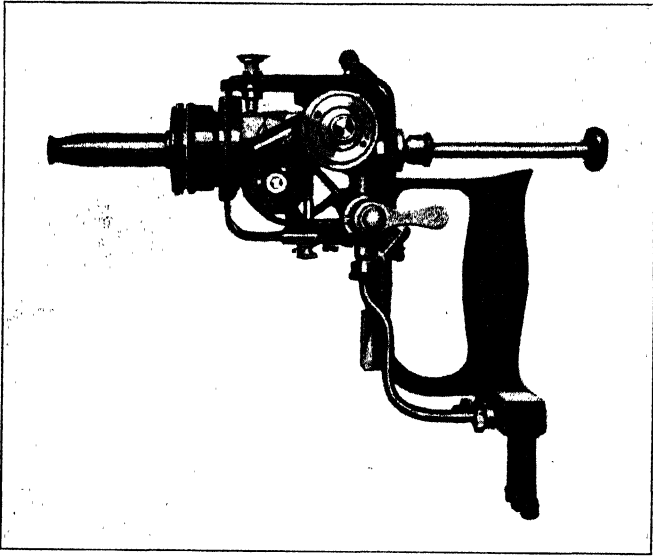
Wire-spraying Pistol formerly used by the French Company.
